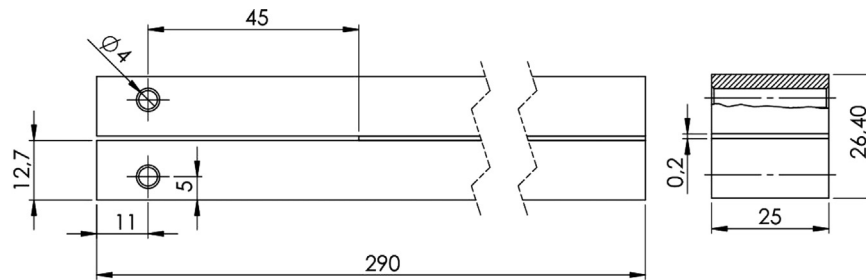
Geometry of the DCB specimen (dimensions in mm).
